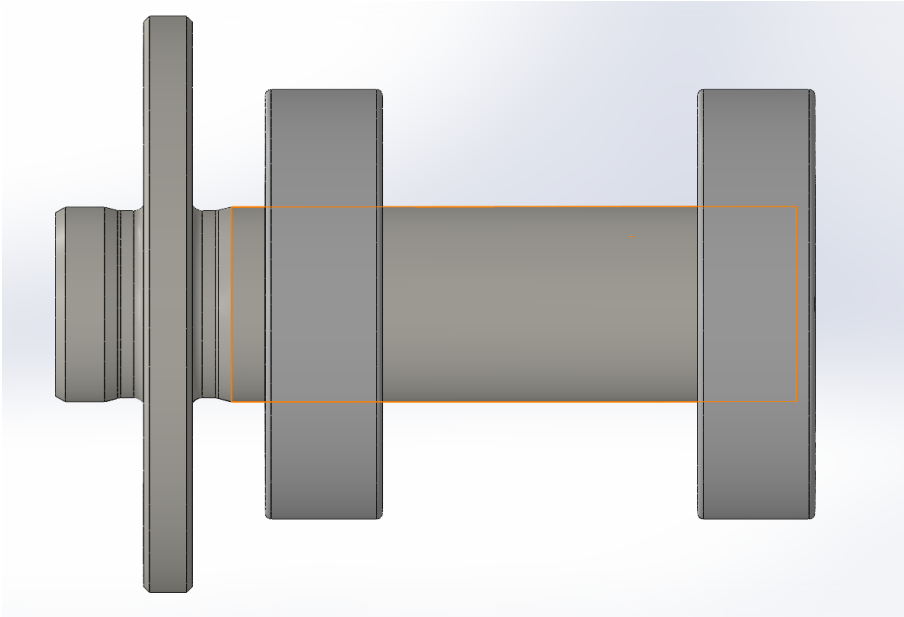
STRIPPED DOWN MOTOR. SIDEWAYS VIEW SHOWING BEARINGS AND AXLE
